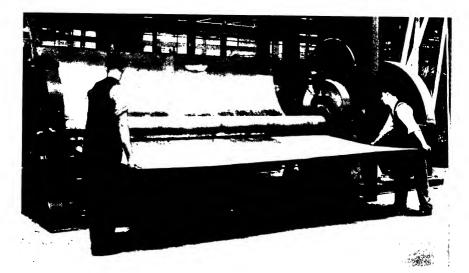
Light Plate Rolling Machine at the Works of Cooke and Ferguson Ltd., Manchester
